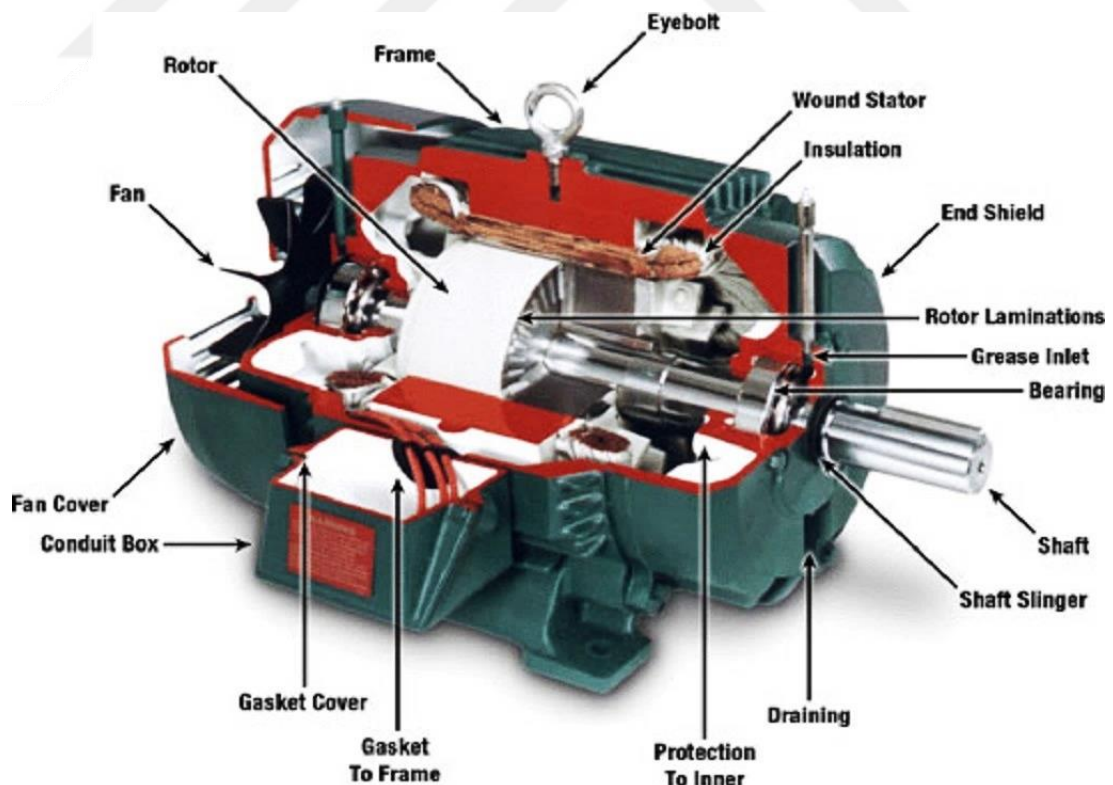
Cut-away Section of an Induction Motor (Electric motor theory., n.d.)
